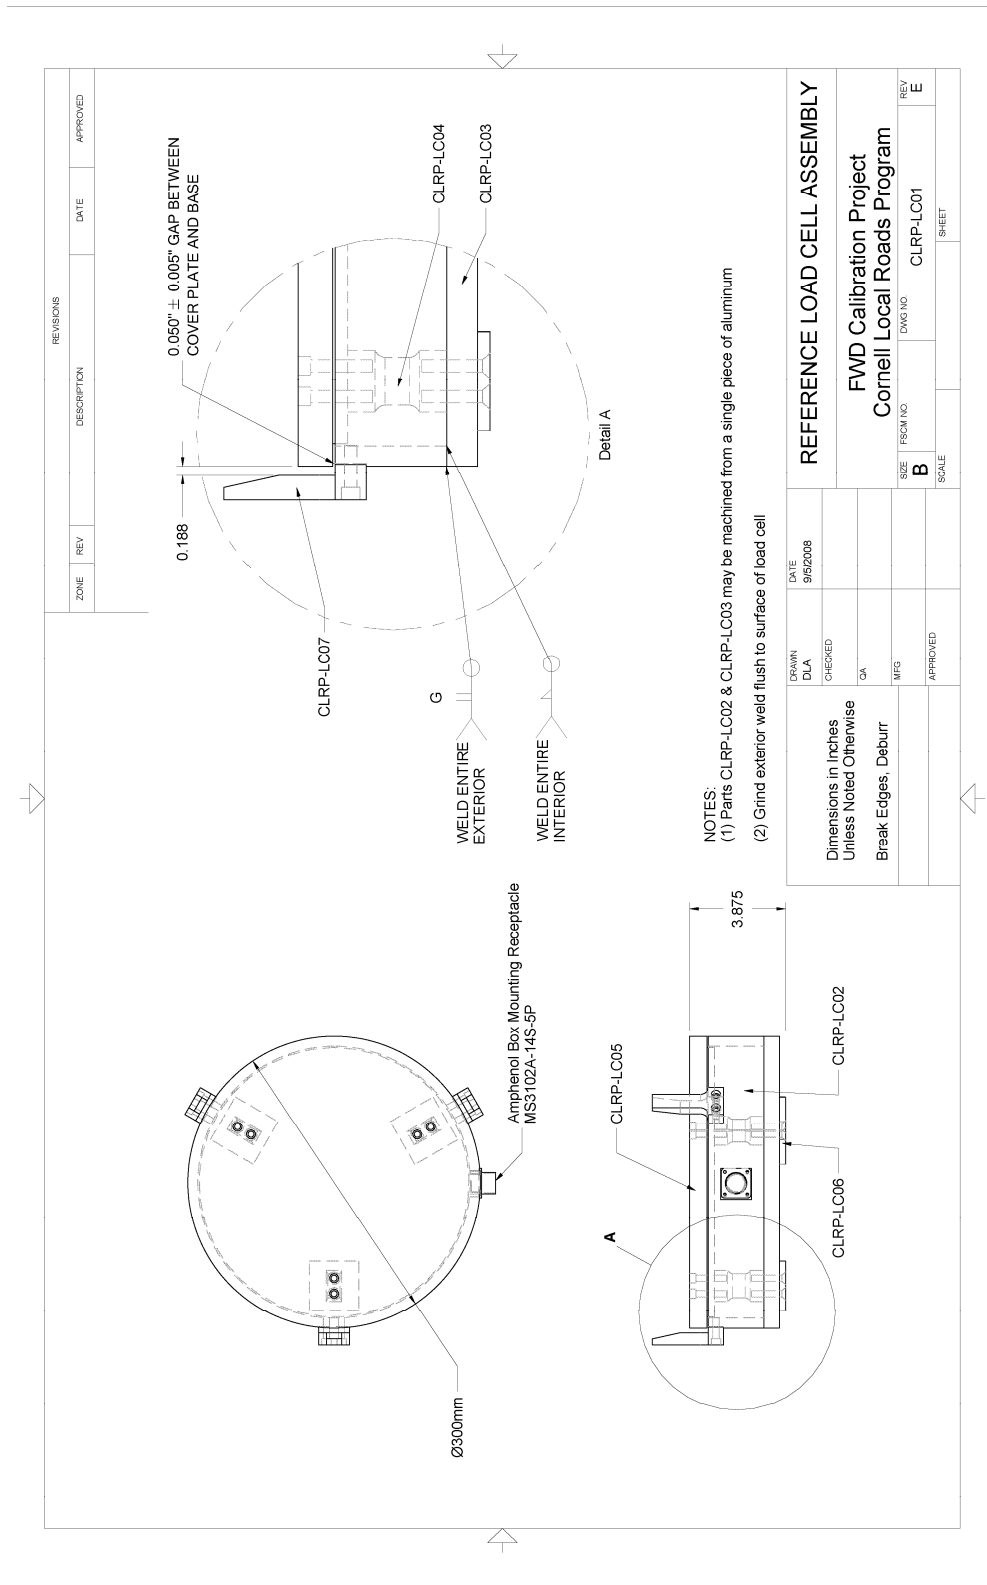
Drawing. CLRP-LC01 Load Cell Assembly.
